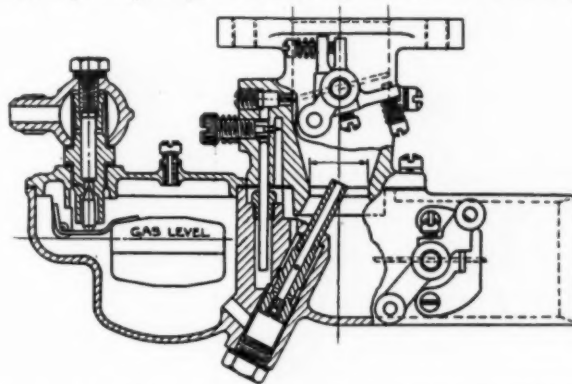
Cross-sectional view of a simple compensated plain tube carburetor showing main fuel jet located in the restricted passageway and the auxiliary fuel feed for idling
